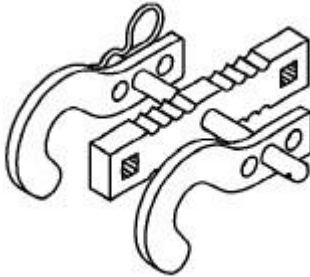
COMPRESSOR, VALVE SPRING - 8215A
